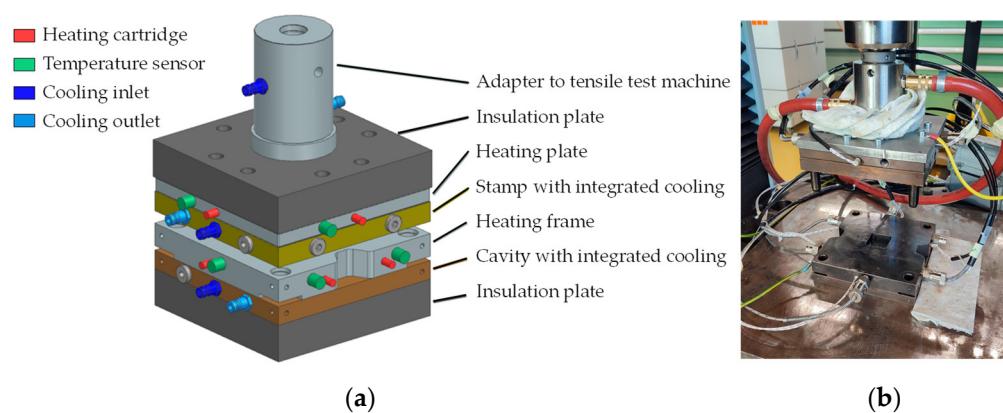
Consolidation experiment setup [44]: (a) schematic illustration; (b) photograph of the setup installed in the testing machine.
